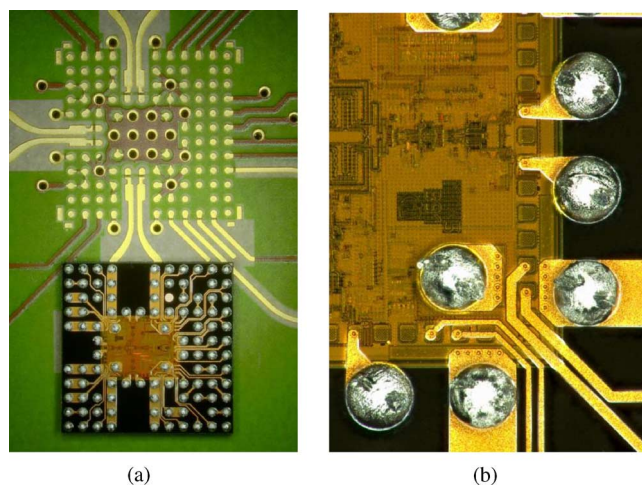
Photographs of eWLB package and PCB footprint. (a) eWLB package and PCB, (b) close-up view.
